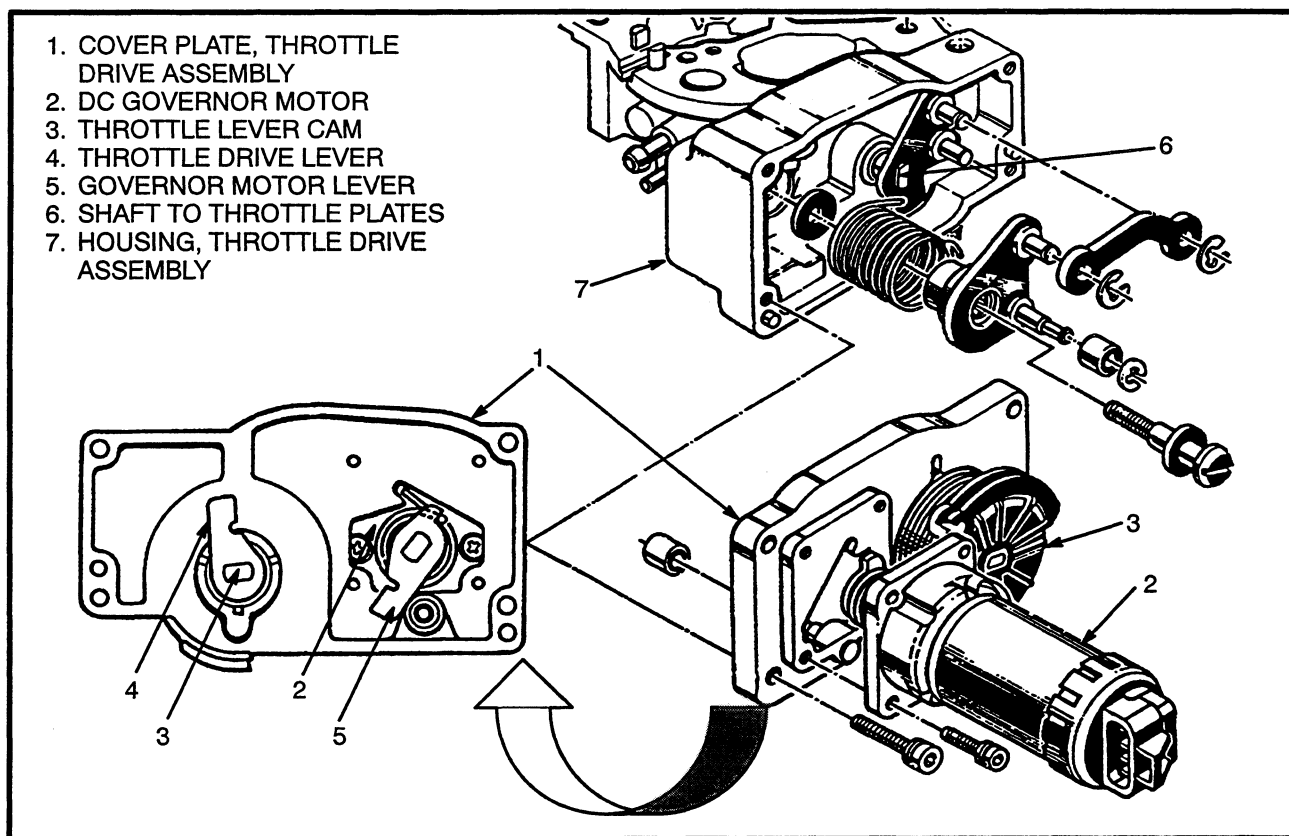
GOVERNOR MOTOR AND THROTTLE DRIVE ASSEMBLY
